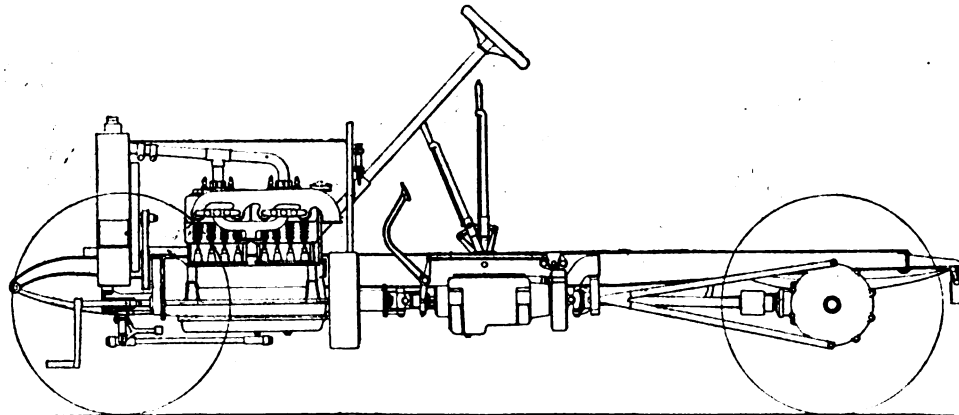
Chassis of Bolide 15-h.p. Car.
